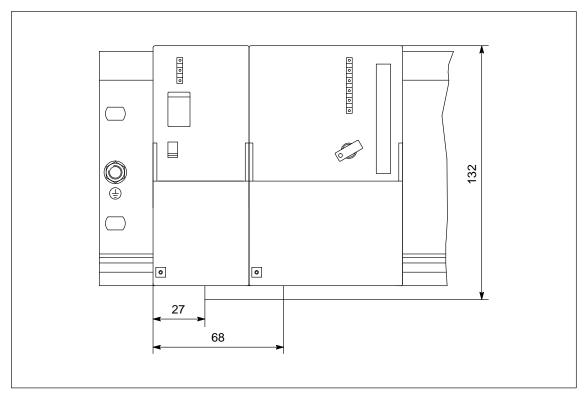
Dimension Drawing of the Power Supply Module PS 307; 5 A with CPUs 313/314/315/315-2 DP. Front View
